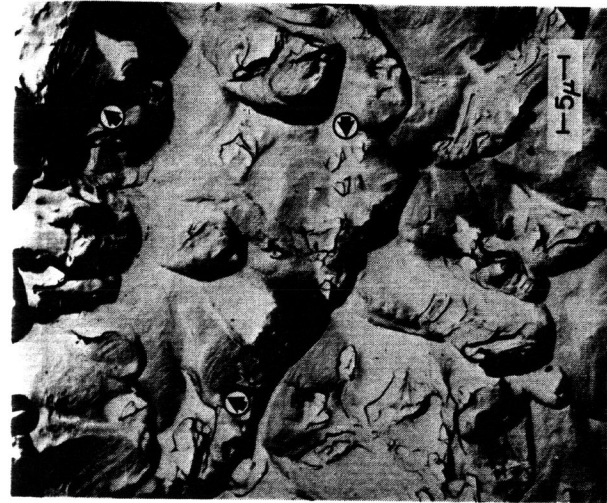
TENSILE FRACTURE OF Al-4.5% Cu (Alloy 2219) WELDMENT. Well defined ripples are evident on some dimple surfaces (oblique arrows). Stretching is indicated by separated parts of second-phase platelets (horizontal arrow). 5000X
